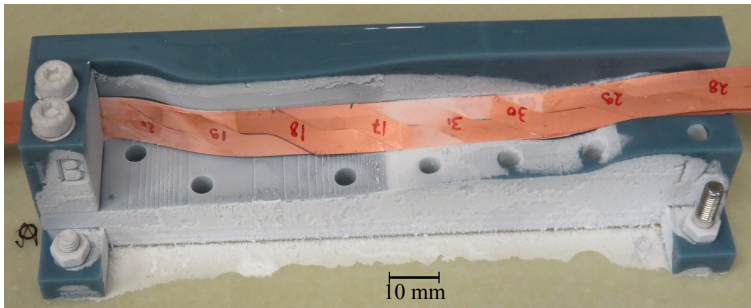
Mould no. 1 with the right-hand assembled Roebel cable (cable 2) after being opened.
